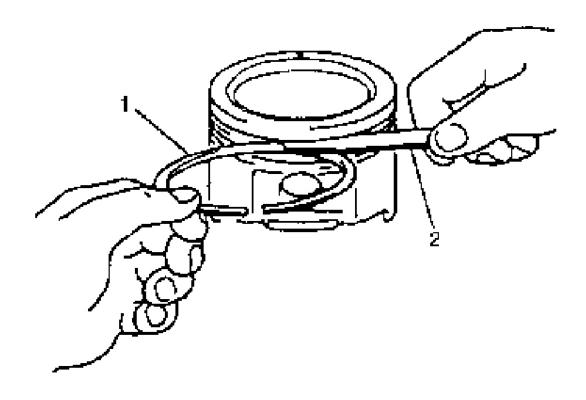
Checking Ring Groove Clearance Courtesy of SUZUKI OF AMERICA CORP.
